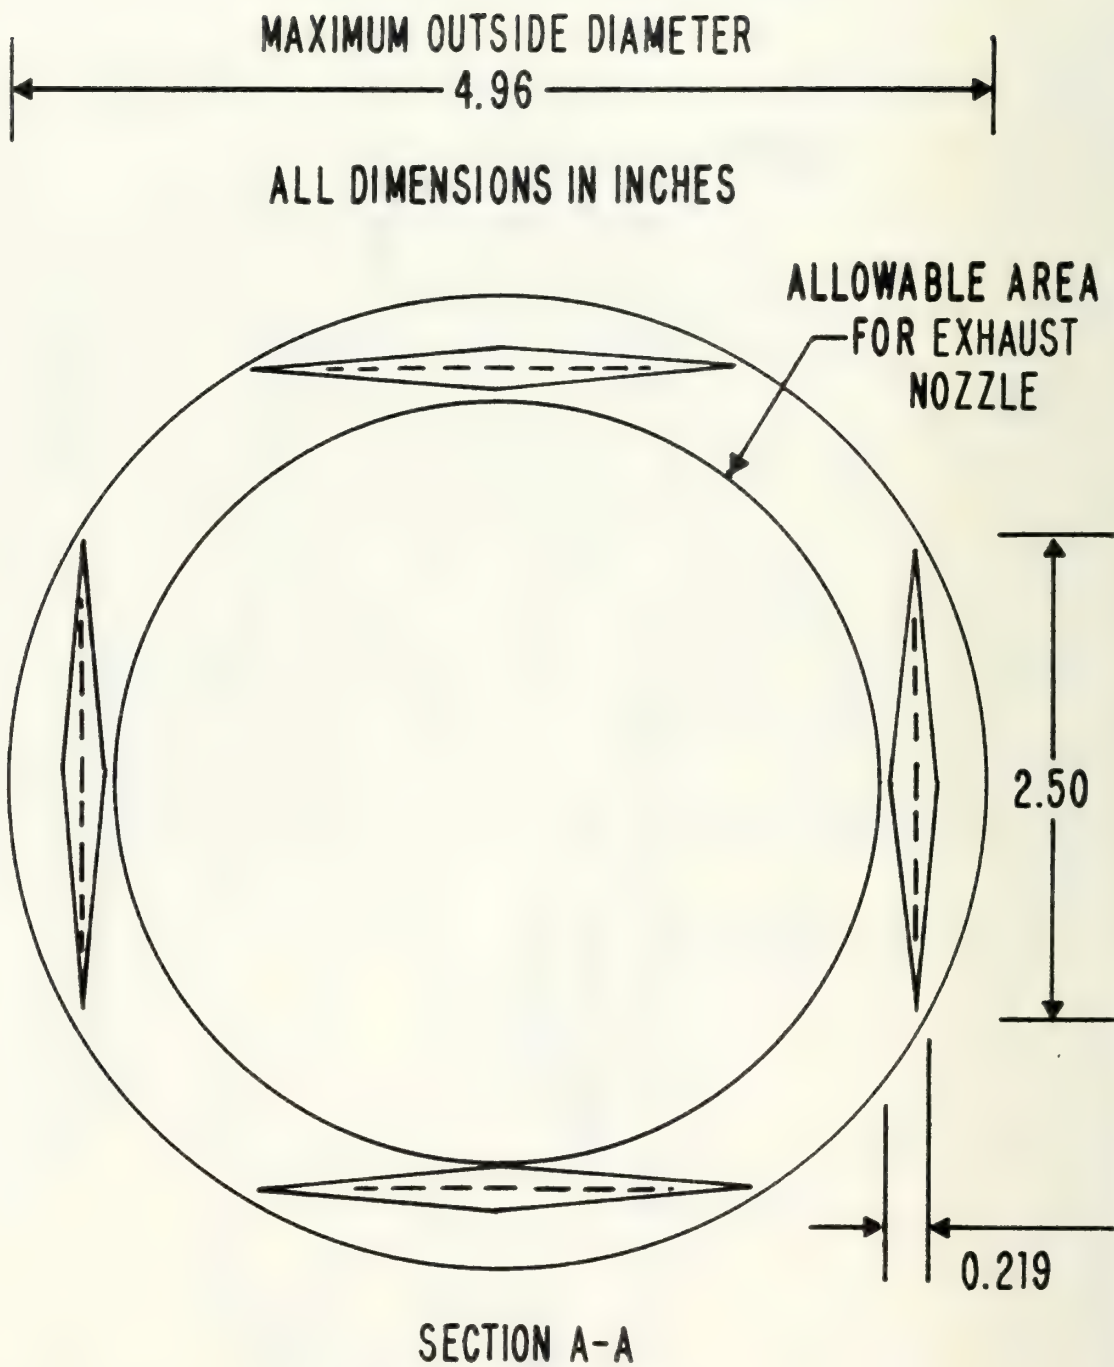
Aft Body Fin Design: Section A-A [24]
